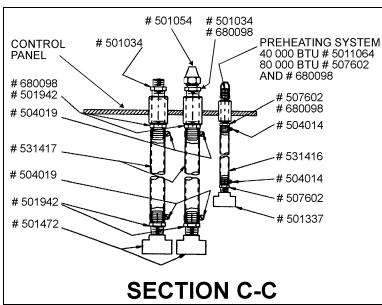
PICK-UP (SUCTION) TUBES ASSEMBLY
